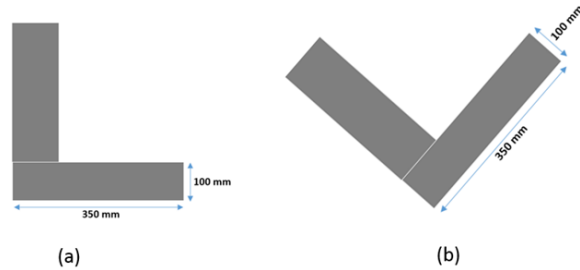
Fillet weld configurations where a) is PB welding position and b) PA welding position.
